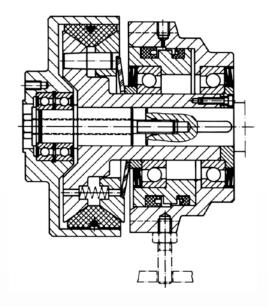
Conax® Friction Clutch type CHFR hydraulically actuated for universal joint
